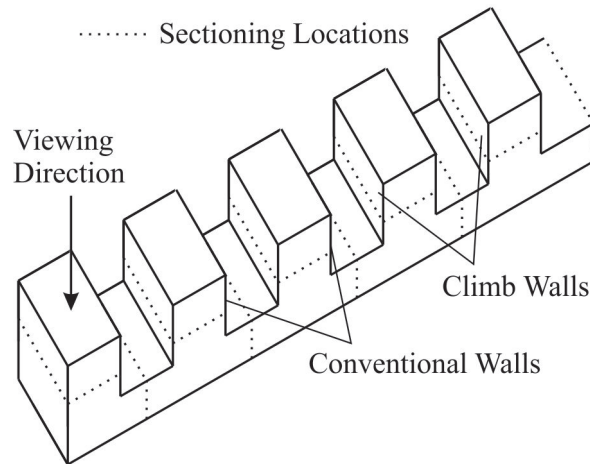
Schematic showing the location of sample section cuts on the milled bar.
